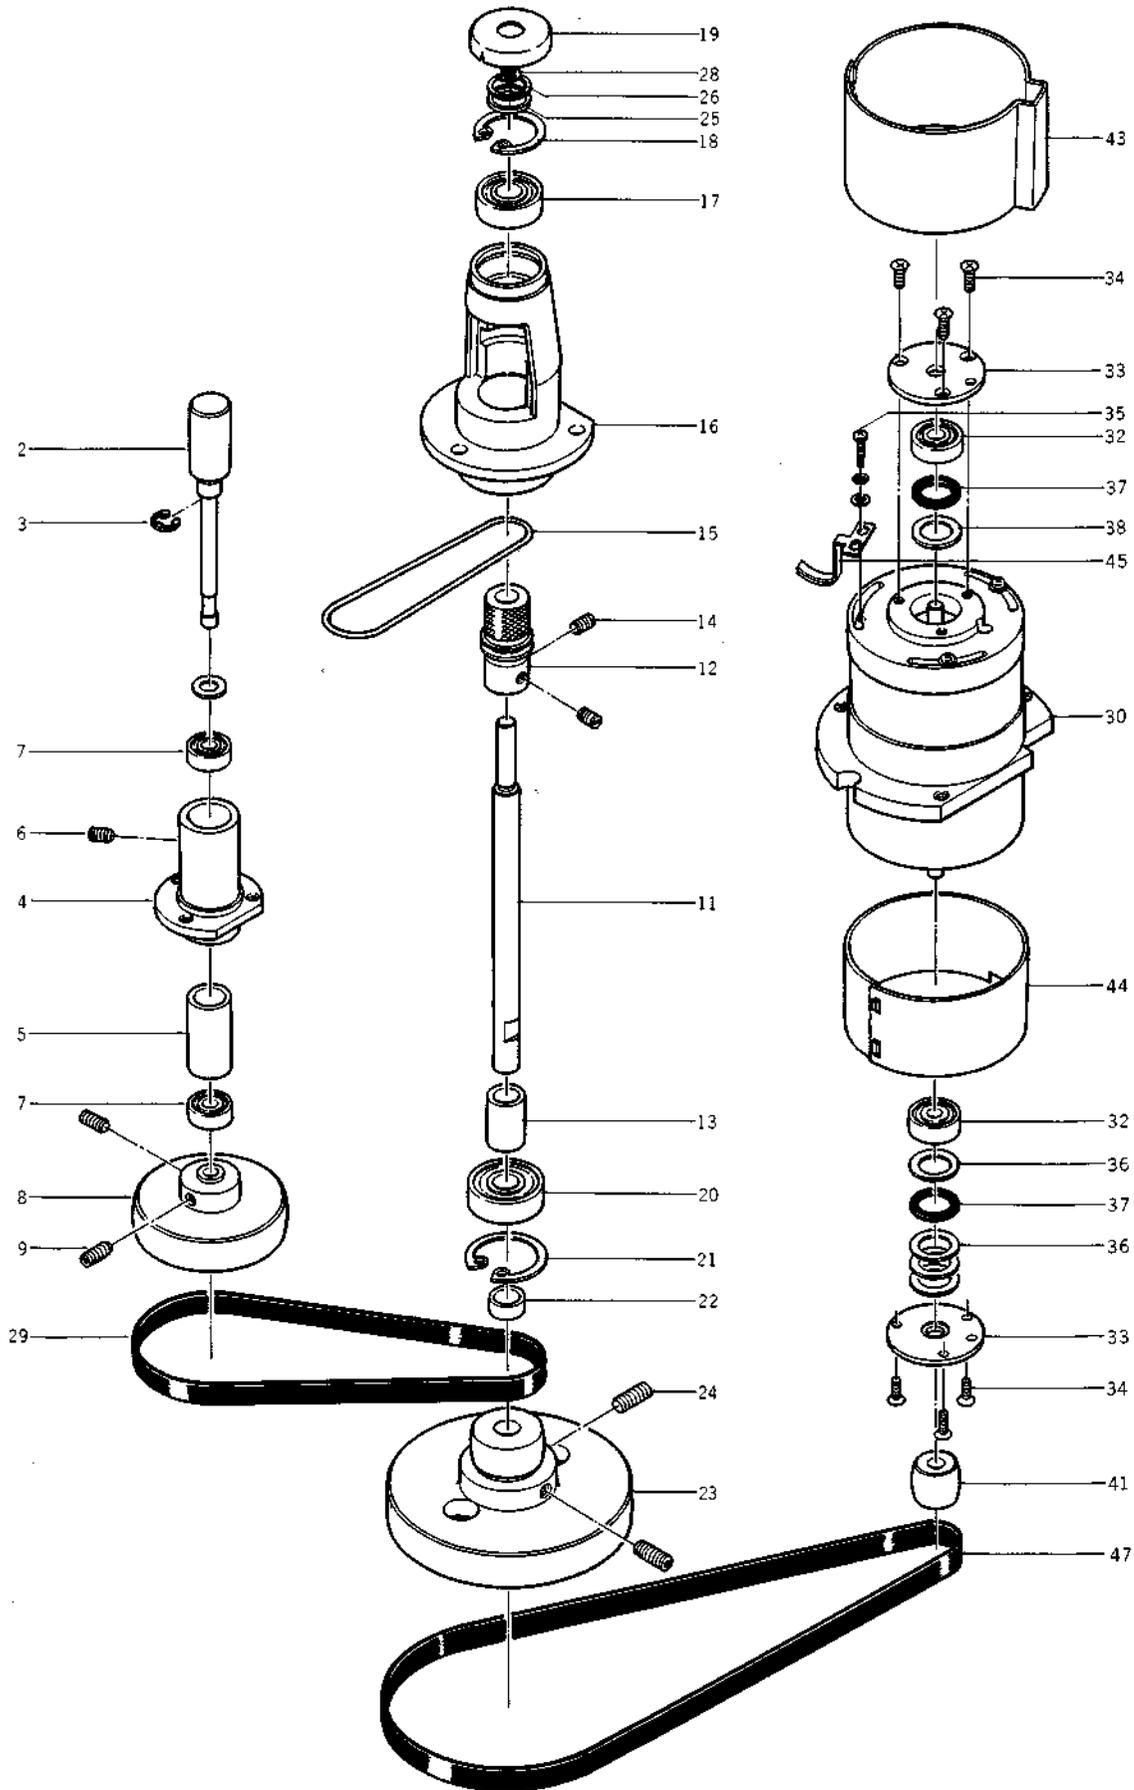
ILLUSTRATION OF REEL TABLE BLOCK
